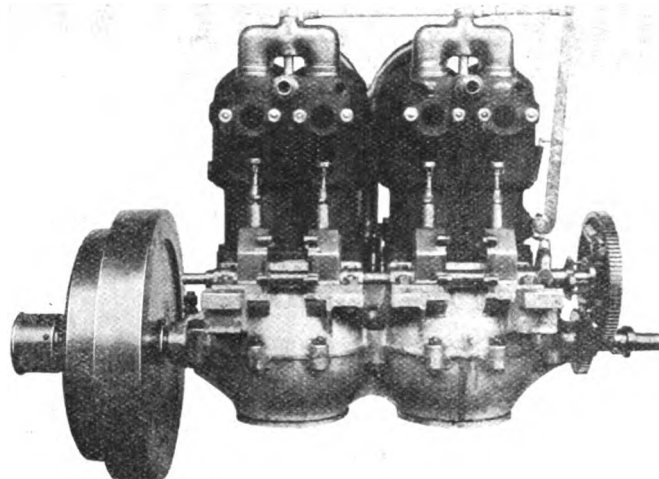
GENERAL VIEW OF MOTOR—EXHAUST-VALVE SIDE.
